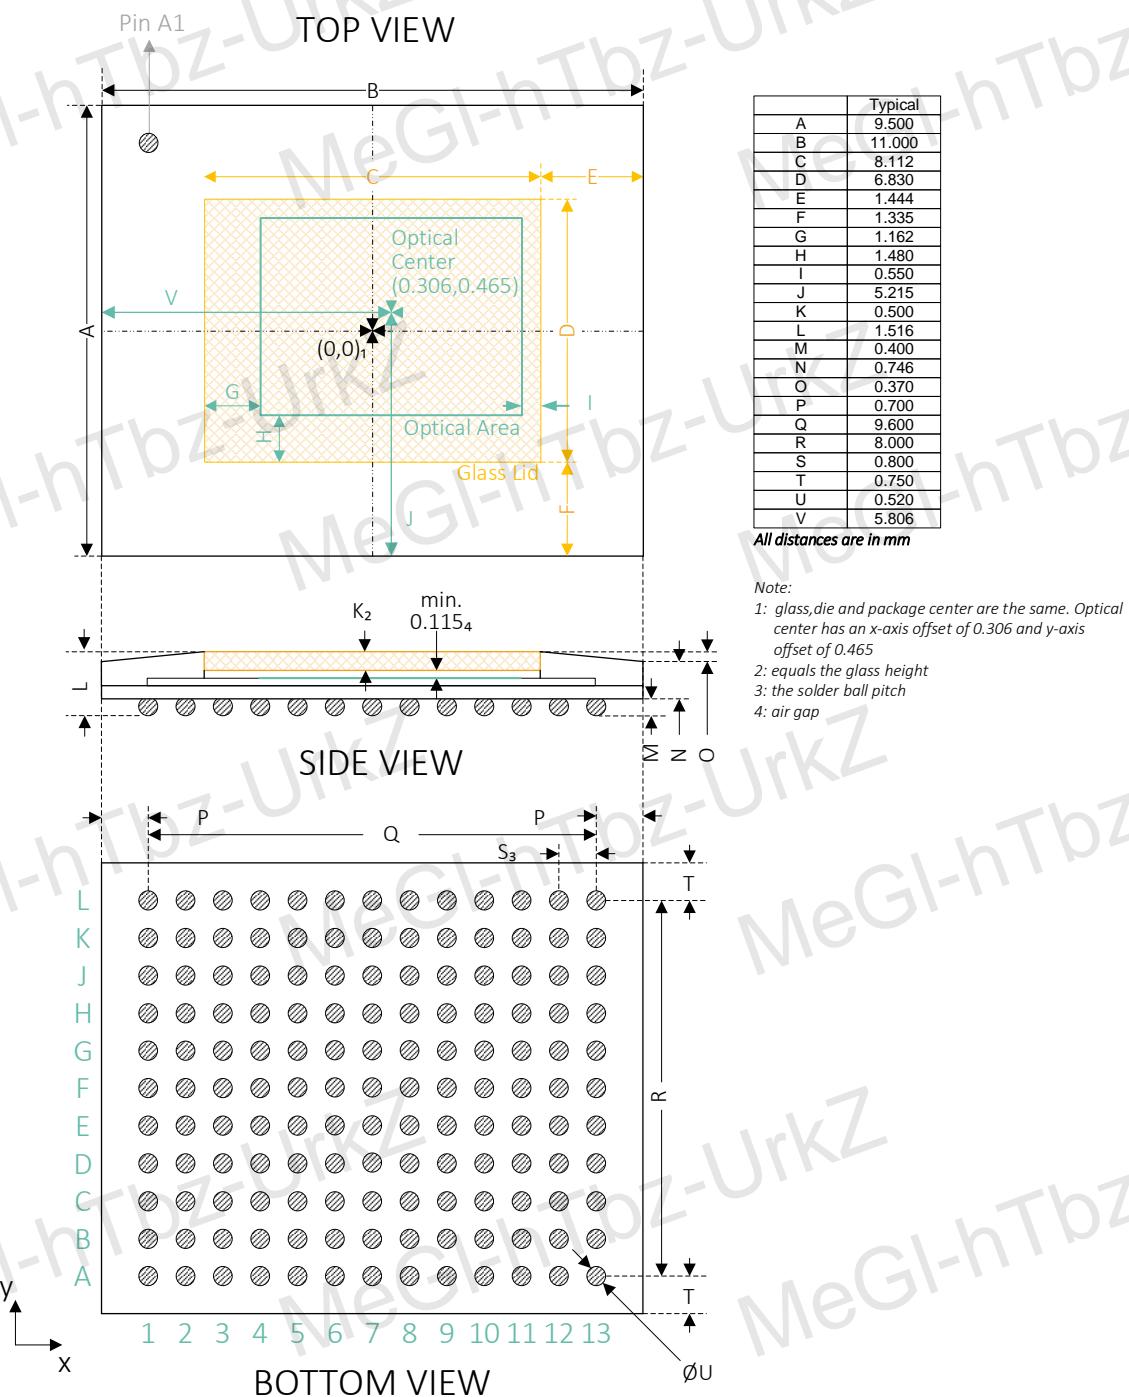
MLX75027RTI, MLX75027STI Mechanical Dimensions (in millimeter)
